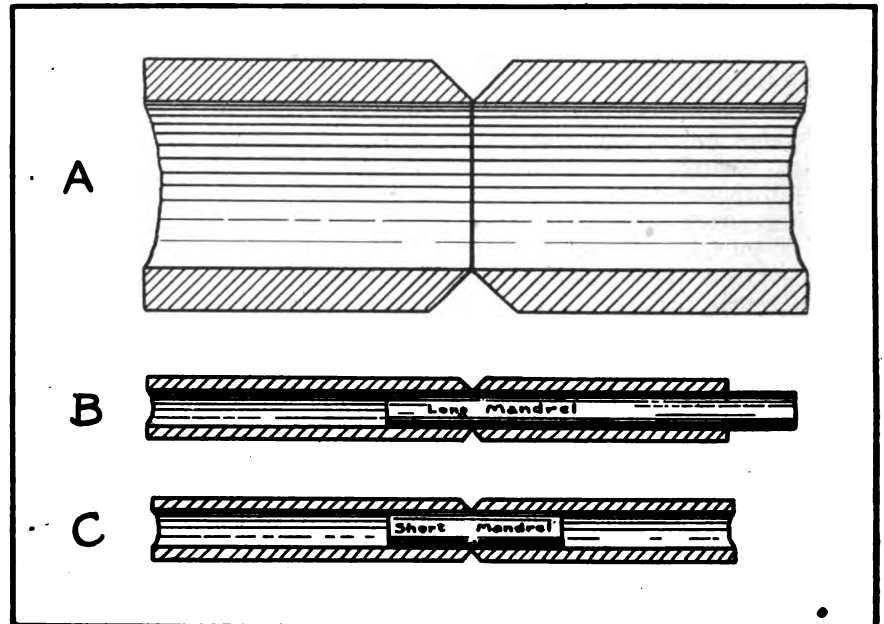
A—ENLARGED VIEW OF SECTION OF TUBING SHOWING ENDS BEVELED AND SET EDGE-TO-EDGE FOR OXY-ACETYLENE WELDING; B—SHOWING HOW THE LONG MANDREL IS USED; C—WITH THE SHORT BAR
